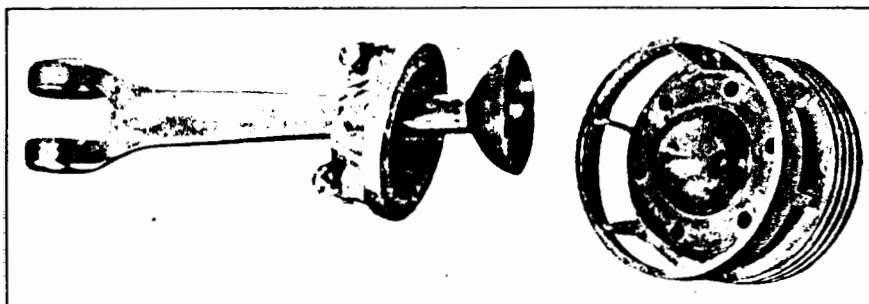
Piston ball joint for Bristol engine, Type R.R.2.
